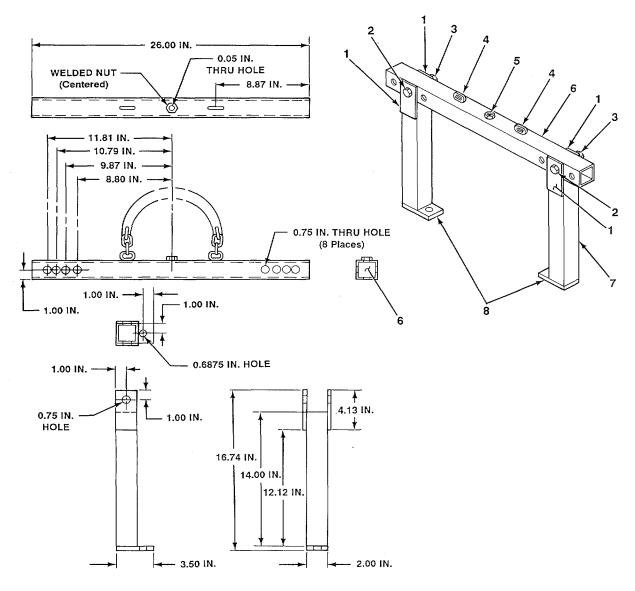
Transmission Oil Supply Flange Removal Brackets.
